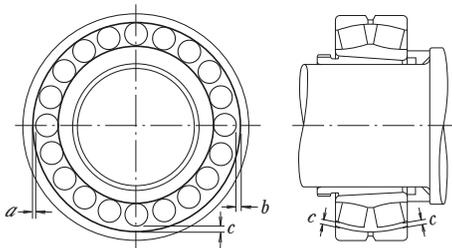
Measuring Clearance in Large Spherical Roller Bearing
